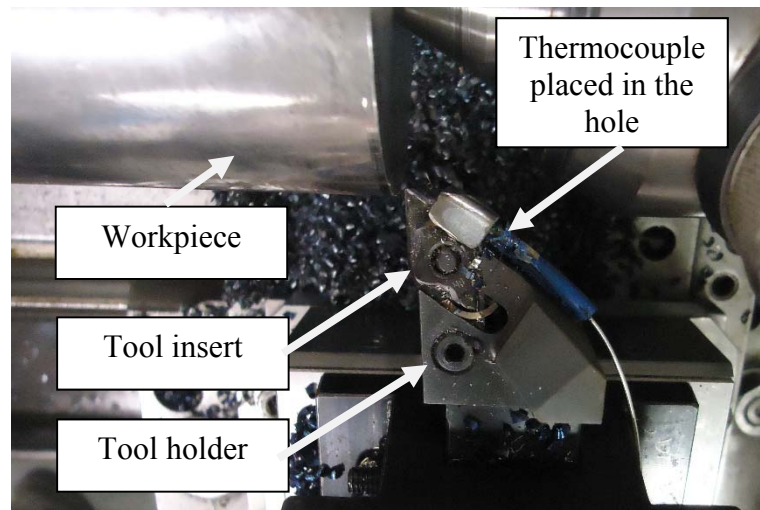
The experimental set up showing the workpiece, tool inset, holder and thermocouple
